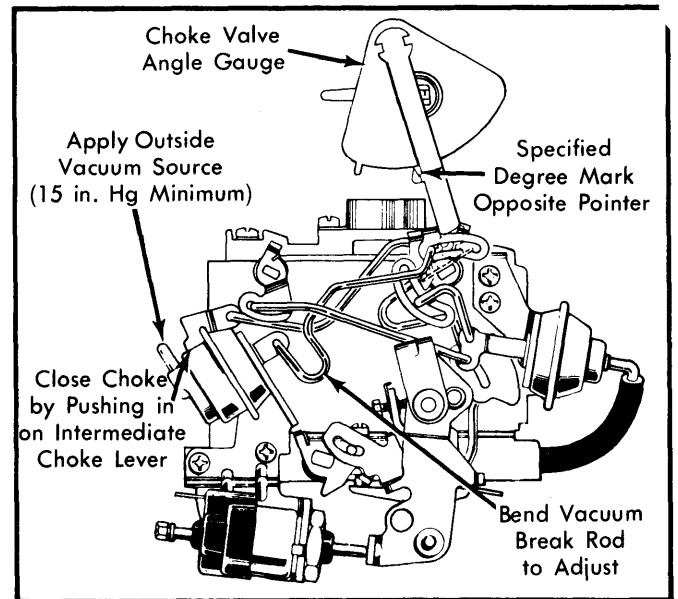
Adjusting Secondary (Rear) Vacuum Break
